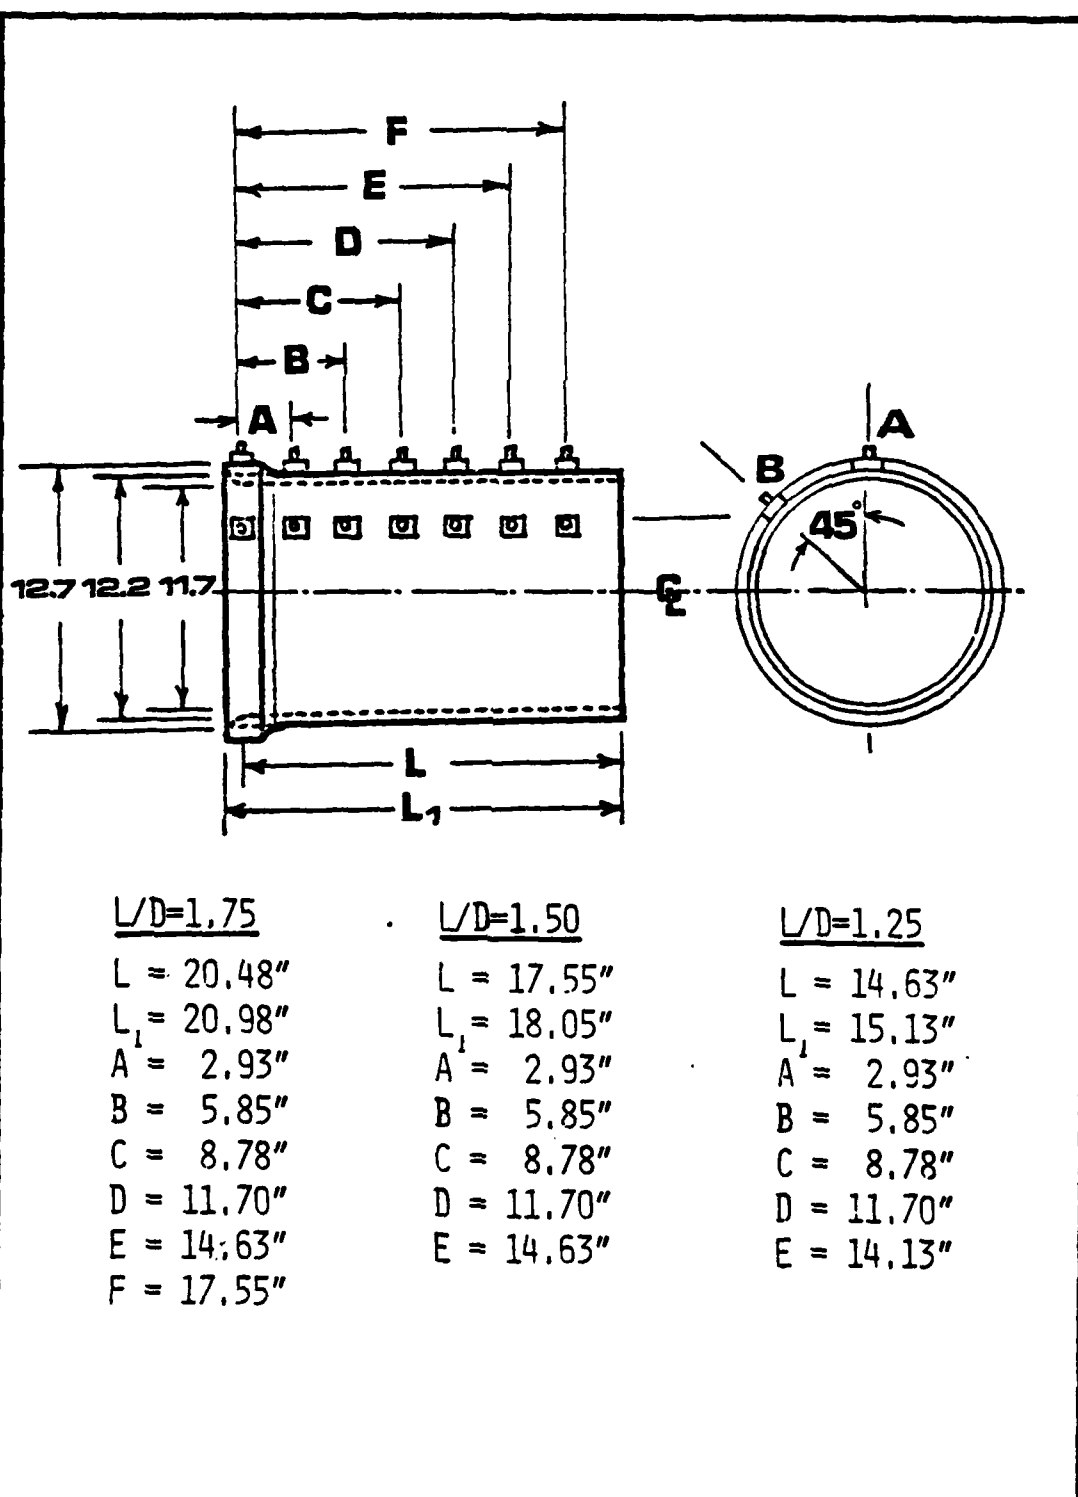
DIMENSIONS FOR SHORT MIXING STACKS INVESTIGATED
